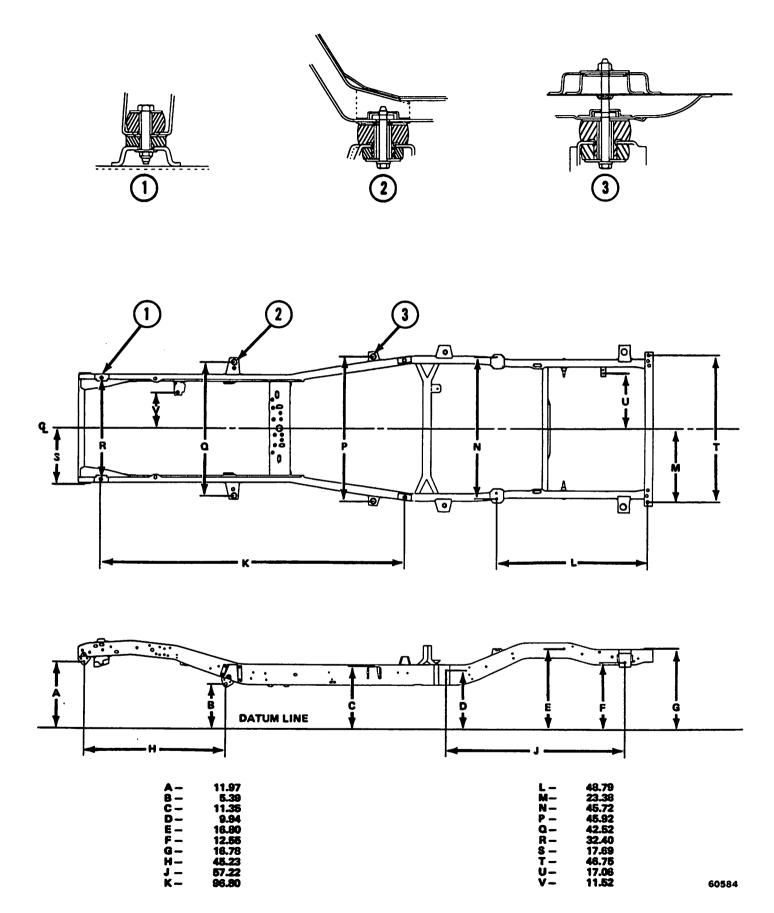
F-4 Truck Frame Dimensions-119-inch Wheelbase (Inches)
